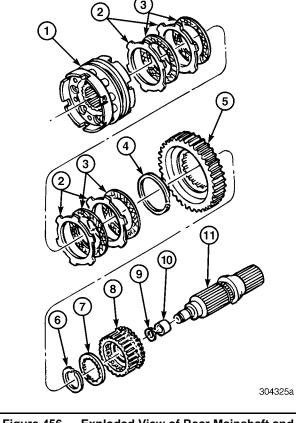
Exploded View of Rear Mainshaft and Synchronizer Assembly
